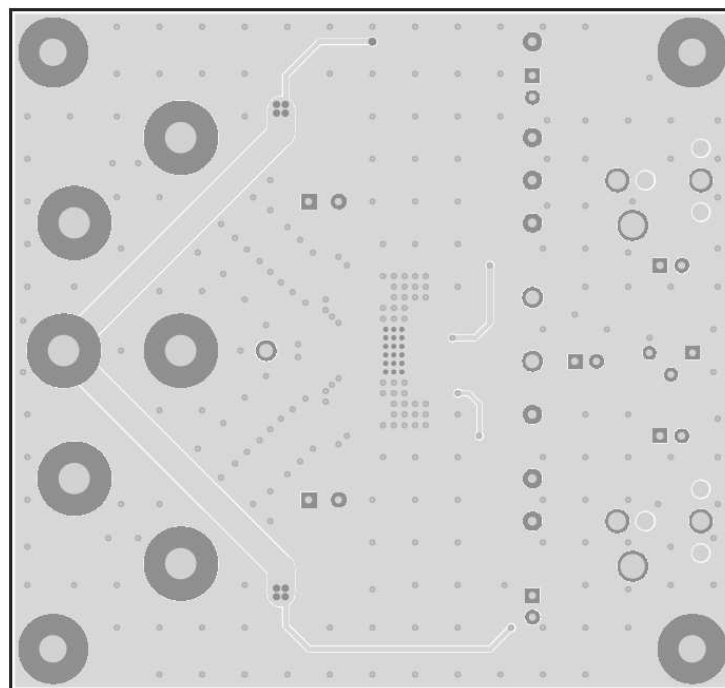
TPA3136AD2EVM Bottom Composite Assembly
